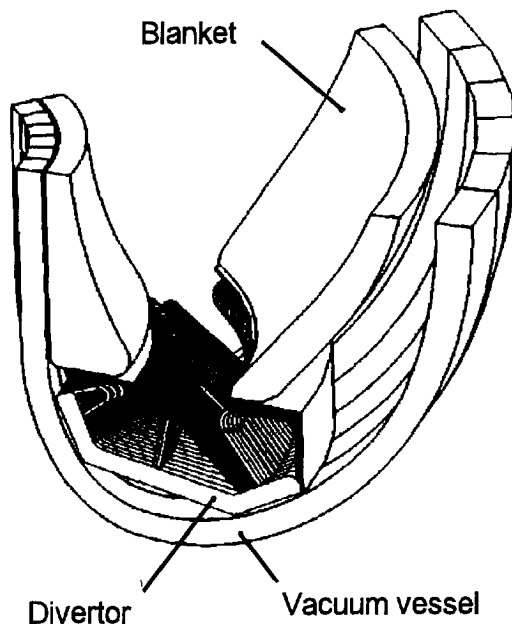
Cut through the vacuum vessel and blanket with view of the divertor design. Only main elements are shown, from Ref. [14].
